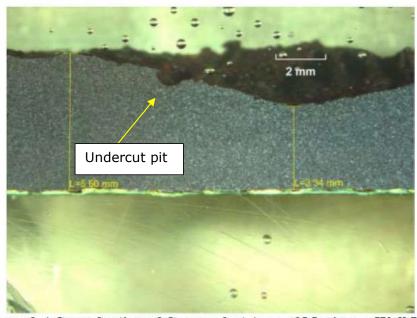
Cross Section of Coupon 3 at Area of Maximum Wall Loss
